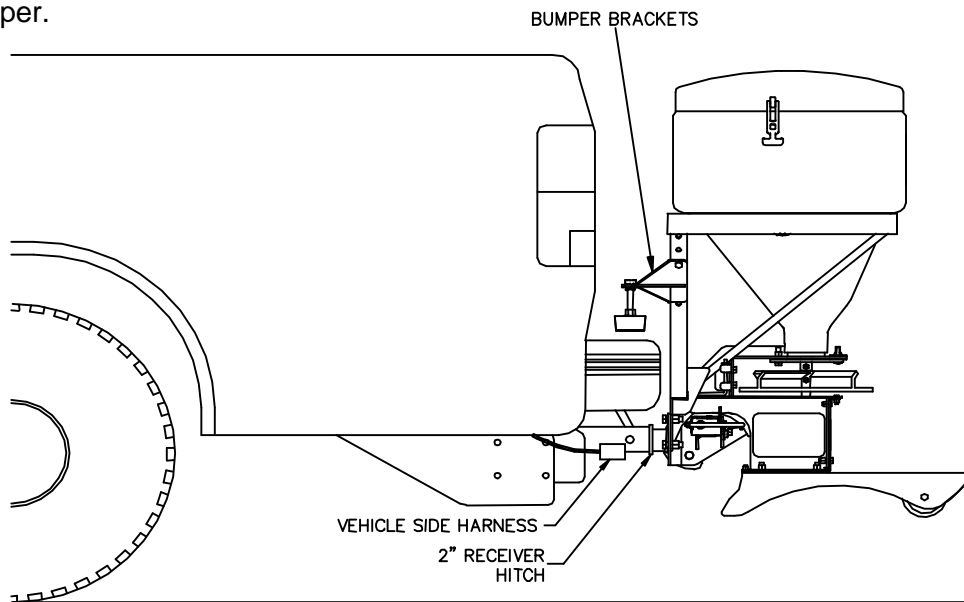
Spreader Attachment (RT3 Option Kit Installed)
